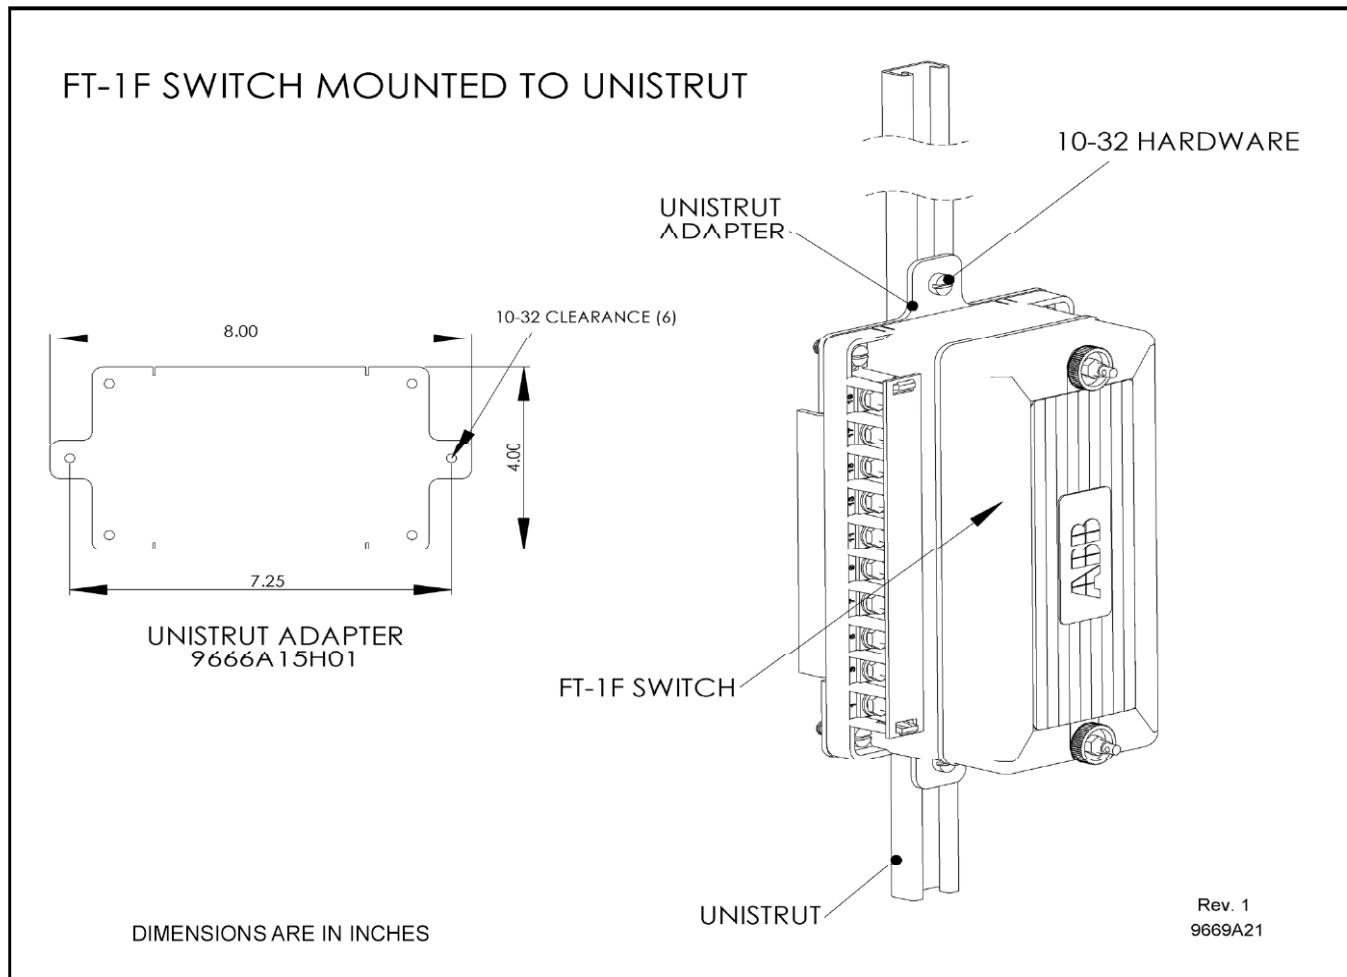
Railmount View of FT-1F using Unistrut Adapter
